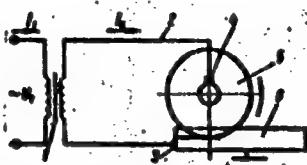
Schematic drawing showing the machining of an object, with tangential feed of the disk.
